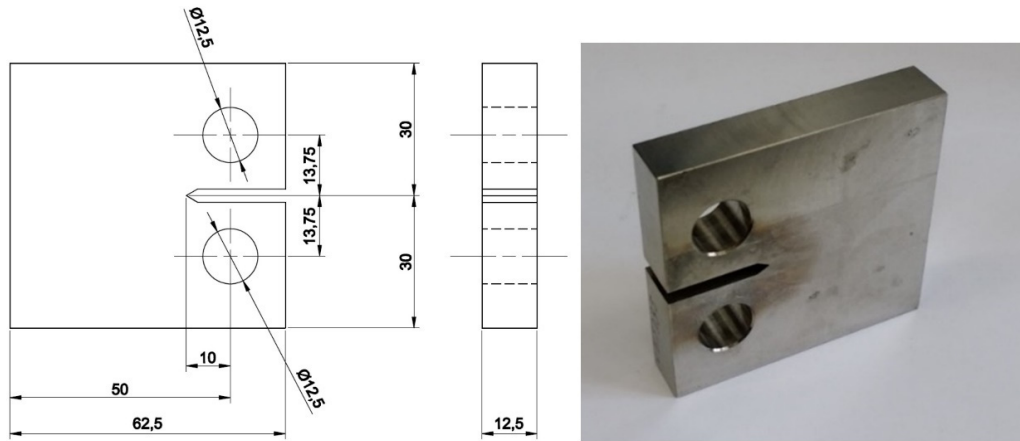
Specimen dimension in mm according to ASTM E 647-00.
